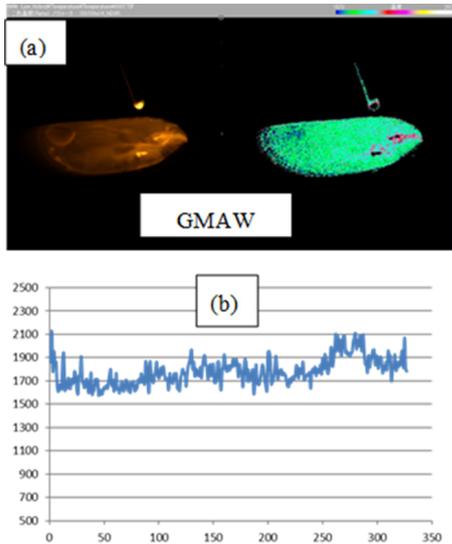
GMAW weld pool imaged by thermal camera. (a) Weld pool surface; (b) Temperature distribution on the weld pool surface.
